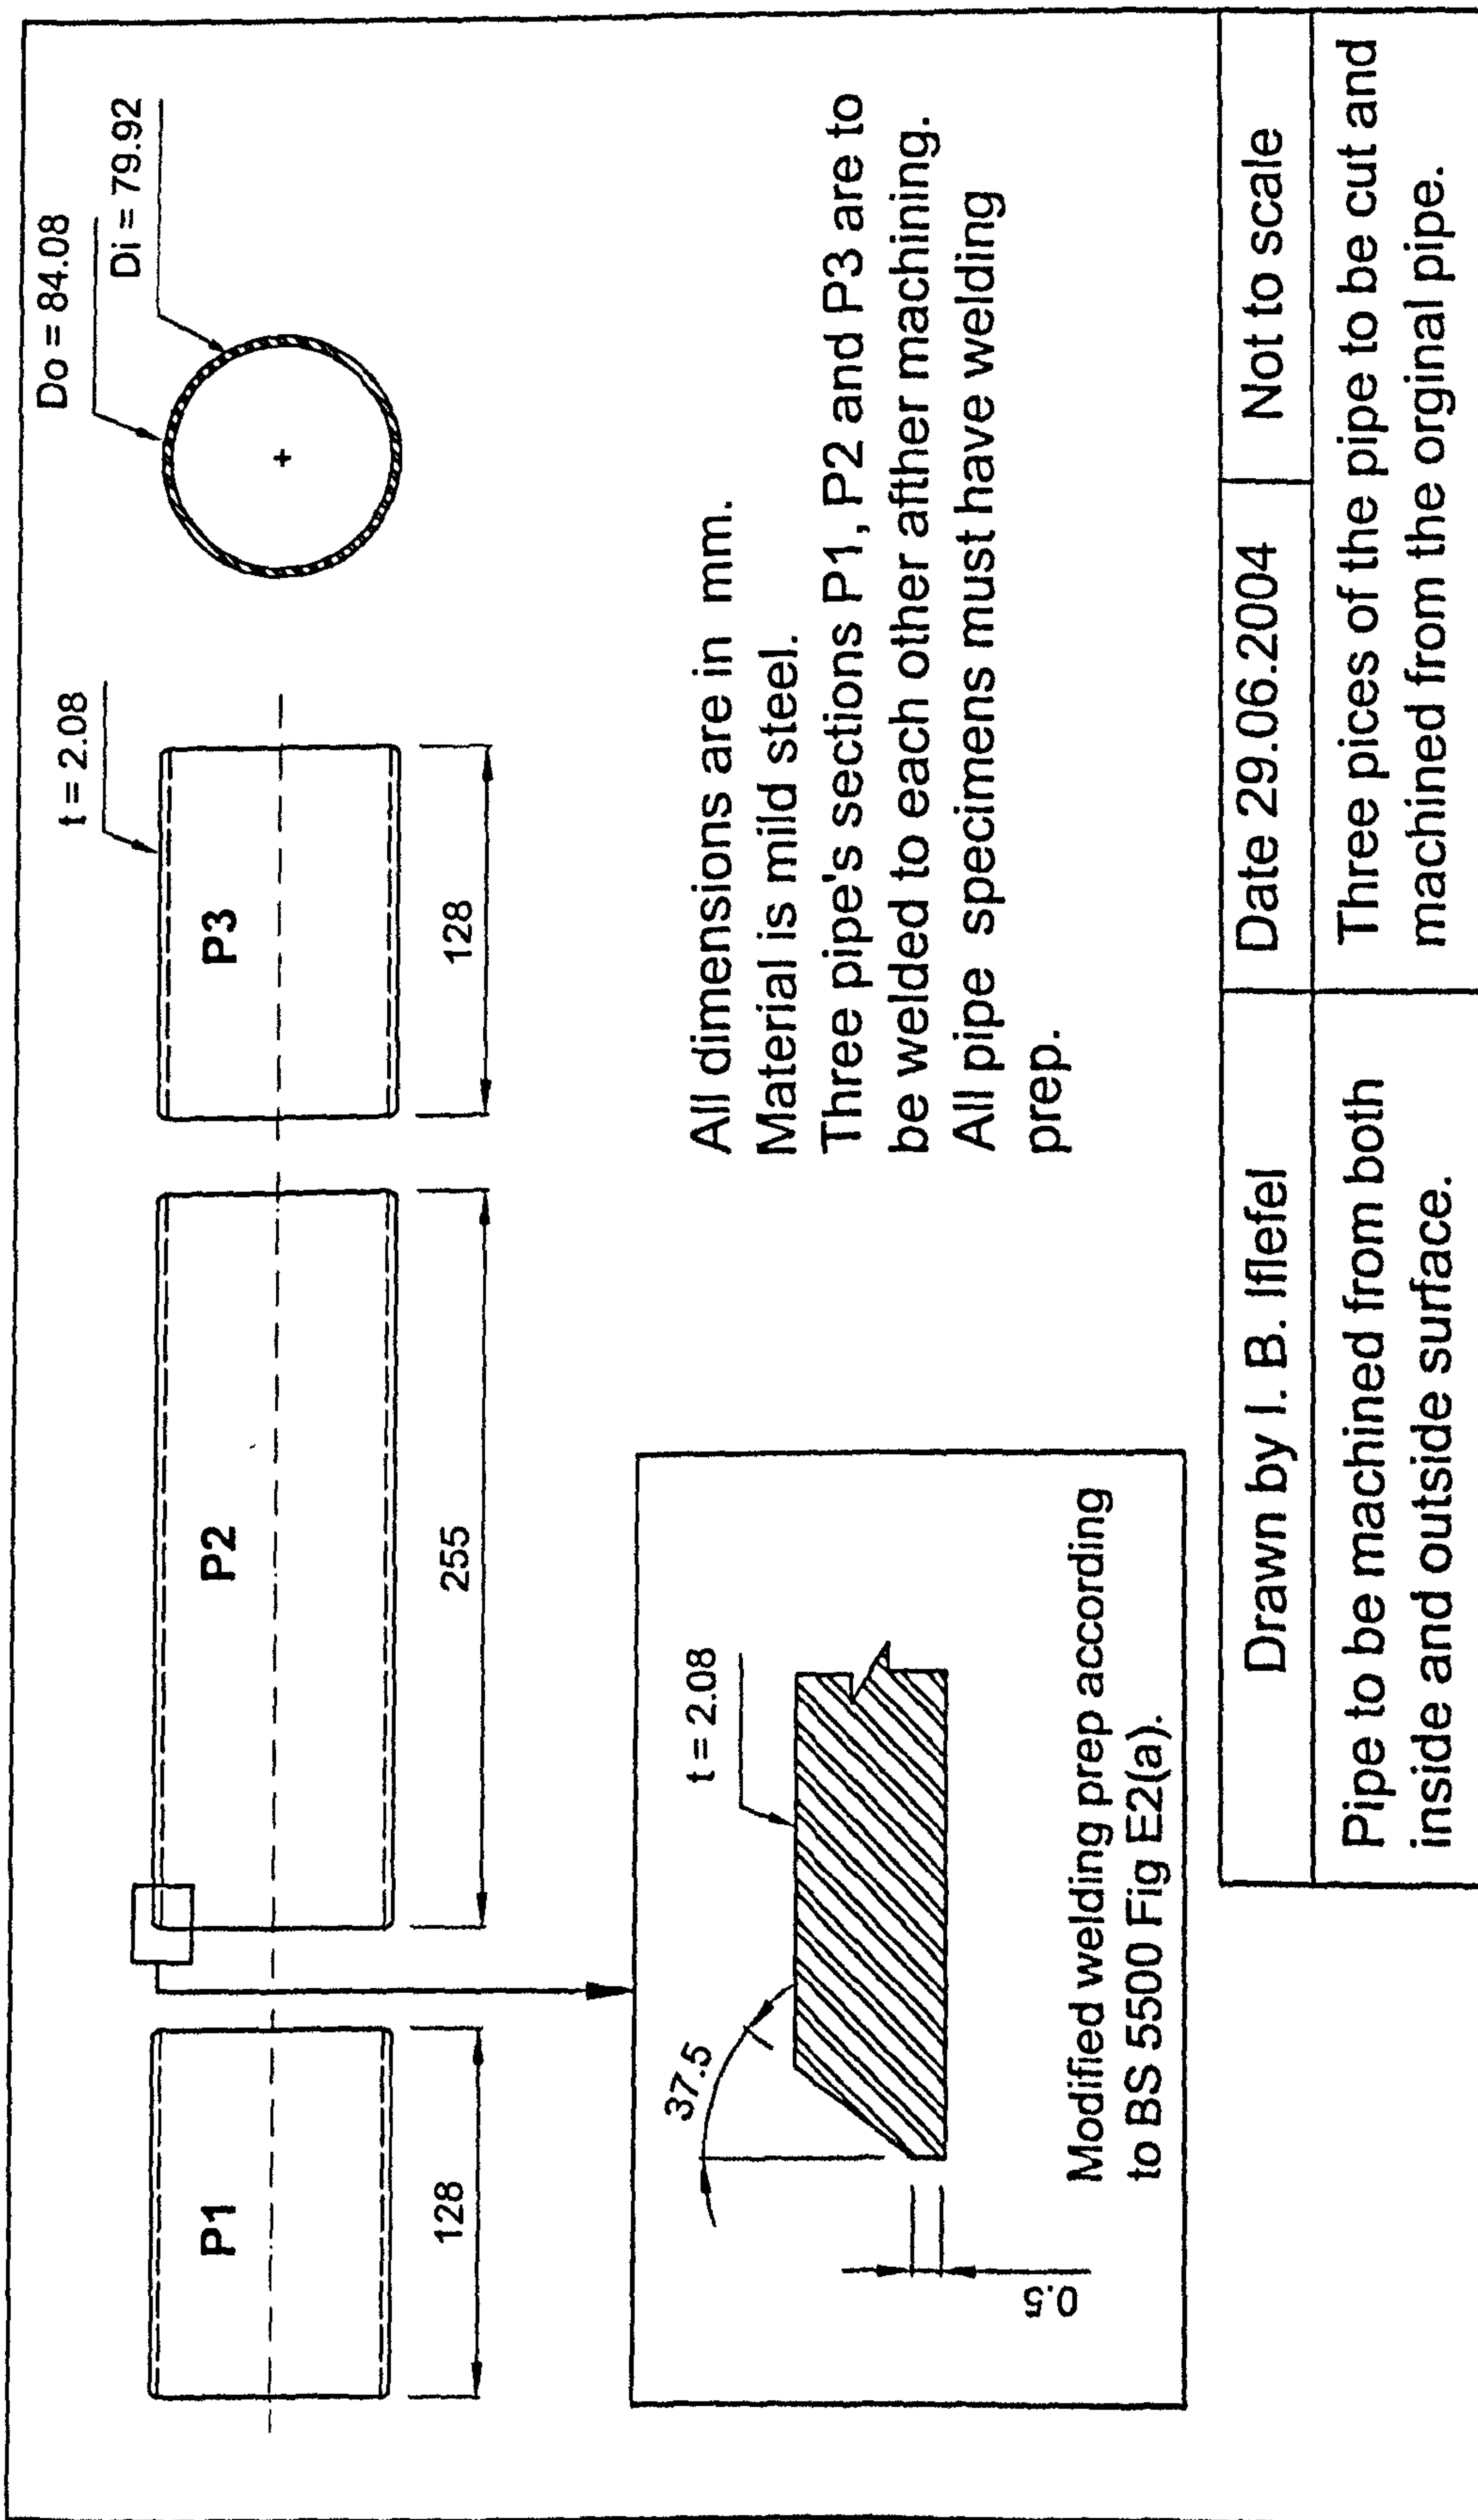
Details of the machining of the test specimens with their welding prep, SP3.
